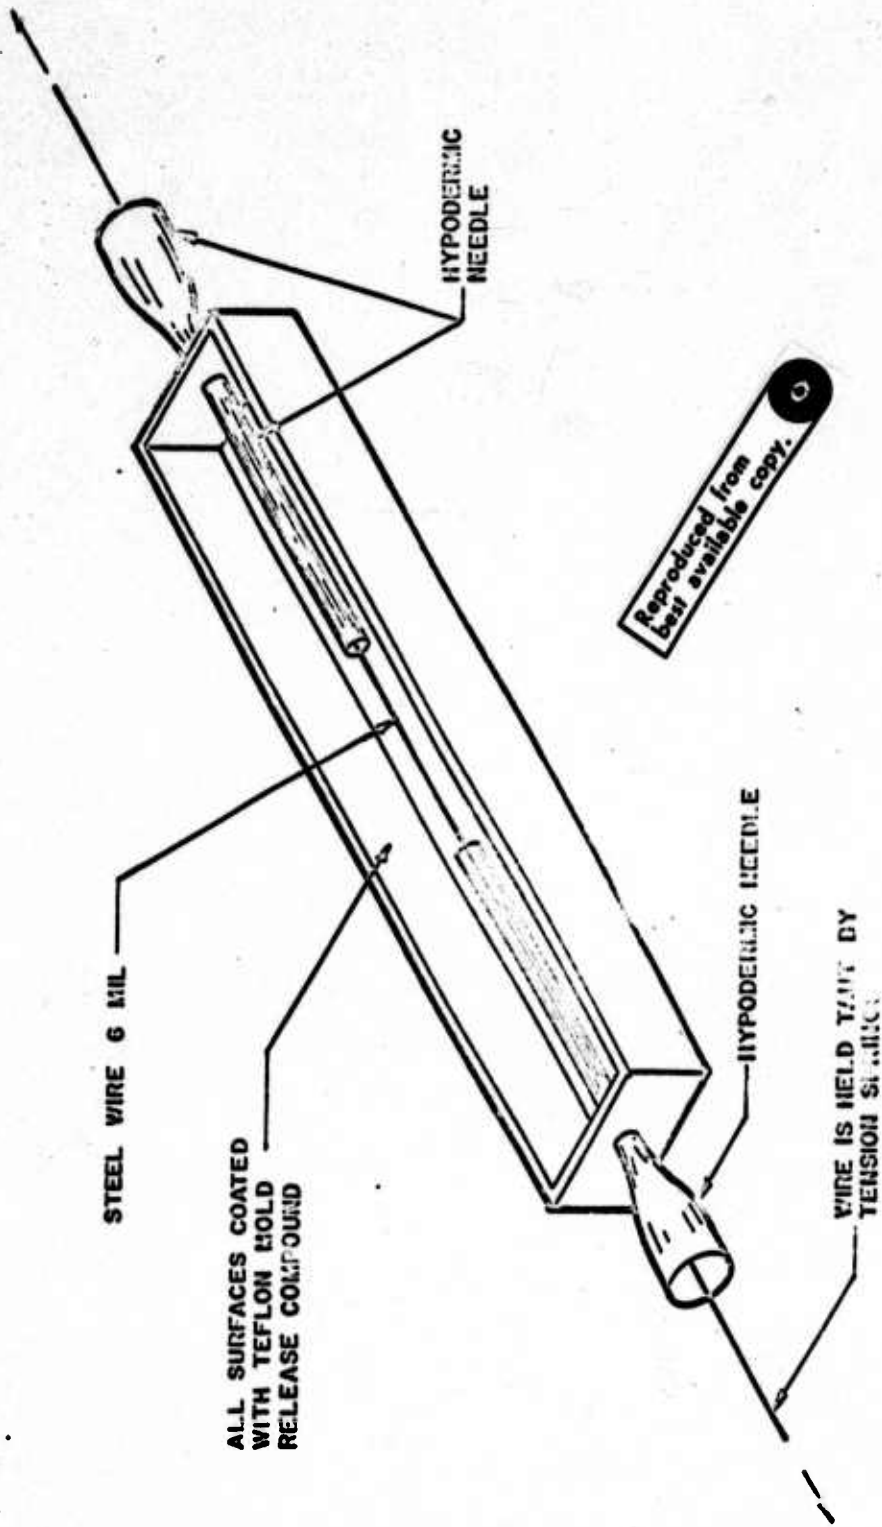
ELASTOMERIC GAGE MOLD PRIOR TO CASTING
